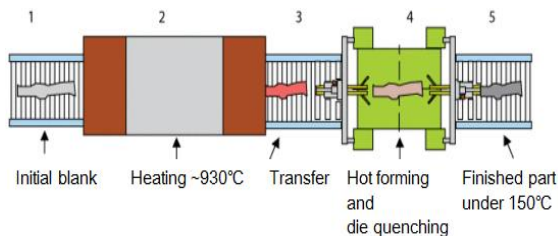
Process of hot press forming (1) Blanking (2) Heating (3) Transfer (4) Hot Forming and die quenching (5) Finished part (Source: AP&T, sweden)
